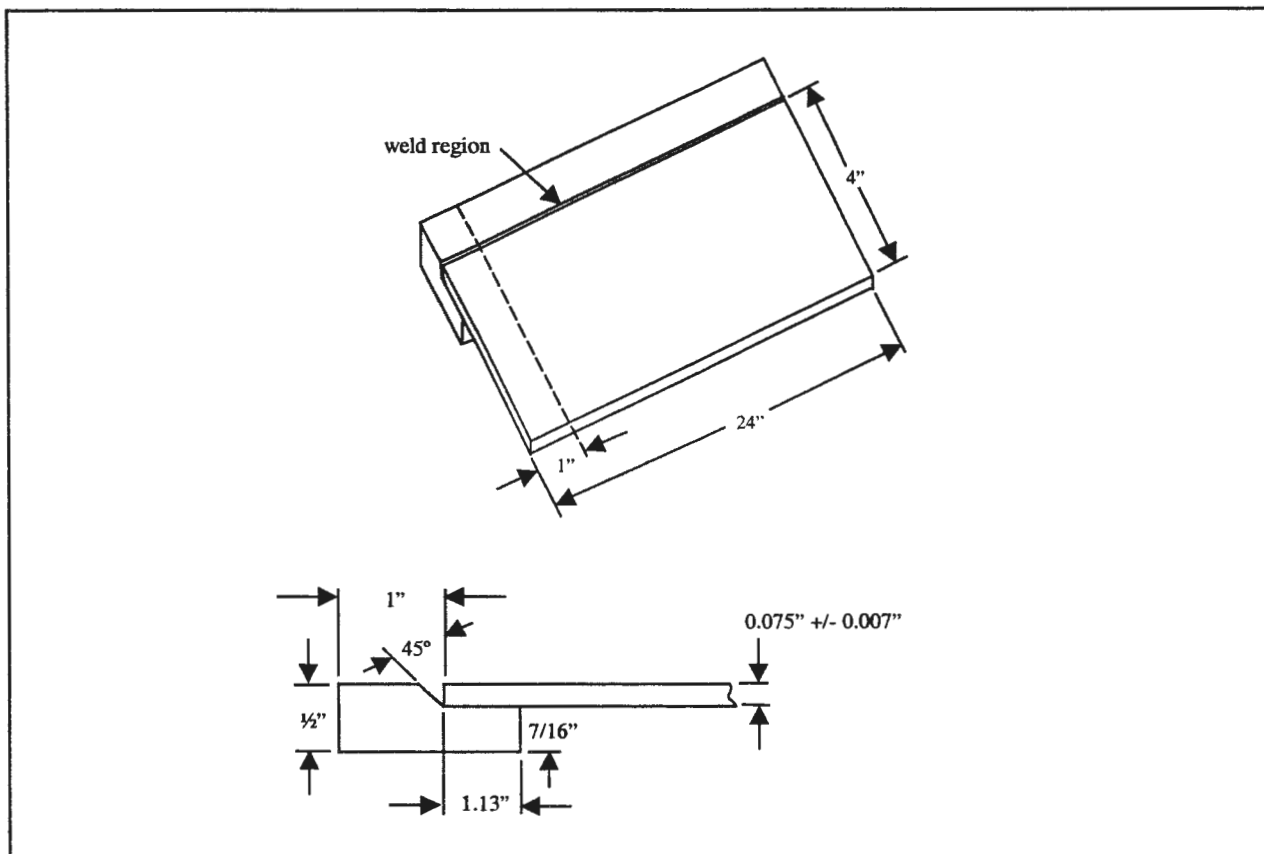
Schematic illustrating dimensions of fillet weld assembly.
